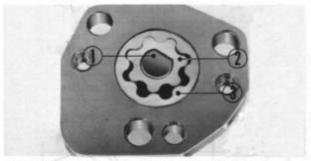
① Oil pump shaft ② Outer rotor ② Inner rotor
